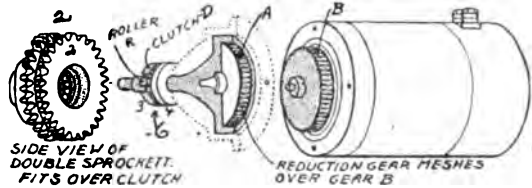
Showing double sprocket (2); roller clutch; gear A attached to clutch; gear B attached to starting motor armature shaft. Parts are separated.
